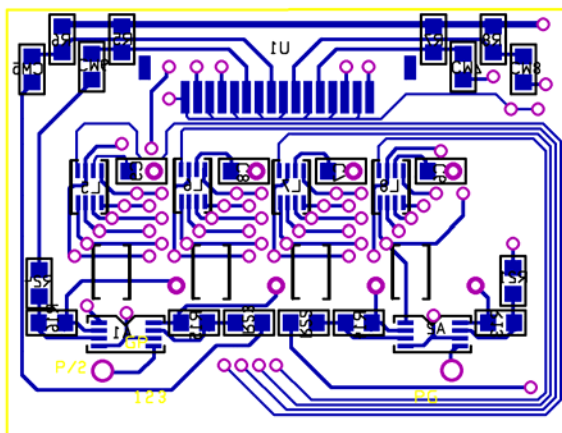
Bottom PCB layer copper and silk from figure 2
